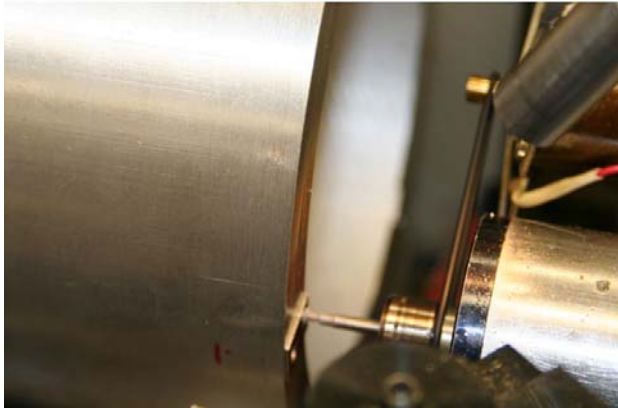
Pin hole being bored. Note belt drive on spindle to provide CW rotation
